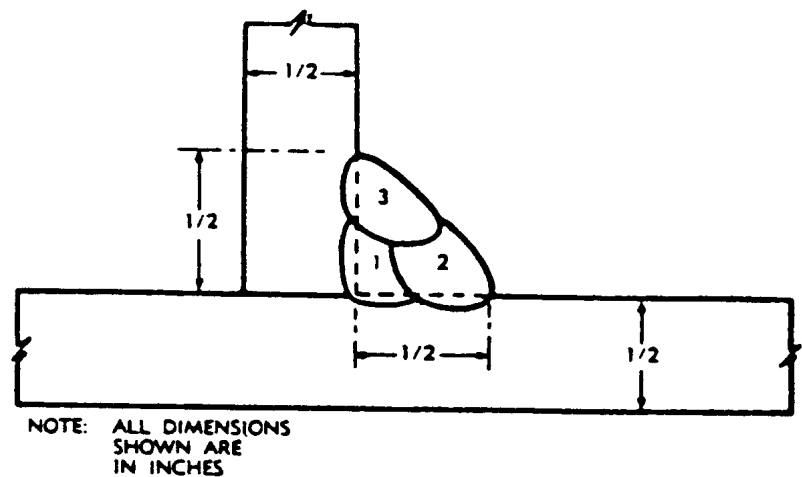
Fillet Welded Tee Joint on Heavy Plate
